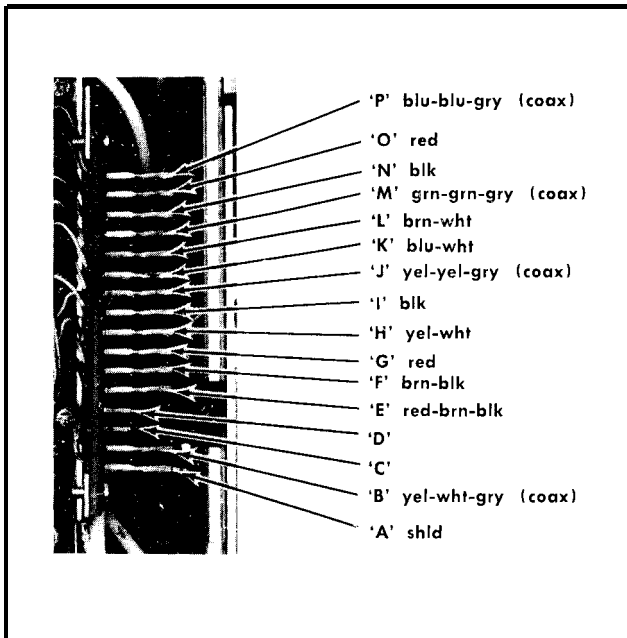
Honeycomb assembly and wire color code to the pin connector.
